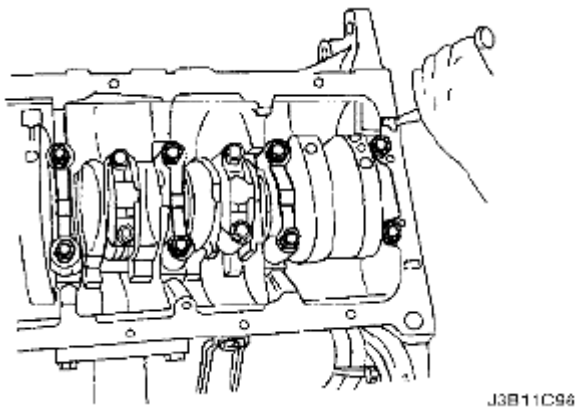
Identifying Crankshaft Bearing Caps And Lower Crankshaft Bearings
